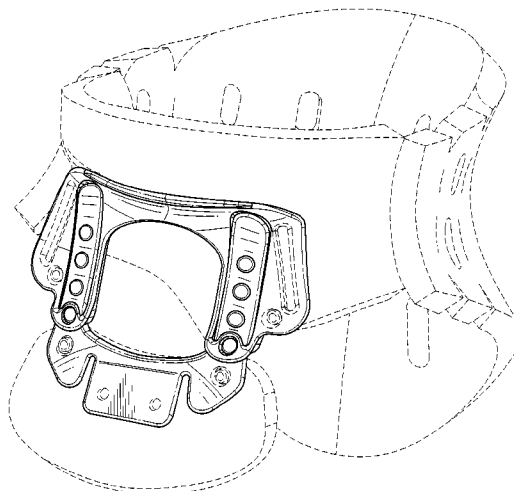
is a second side elevational view according to the height adjustment mechanism of FIG. 1.
